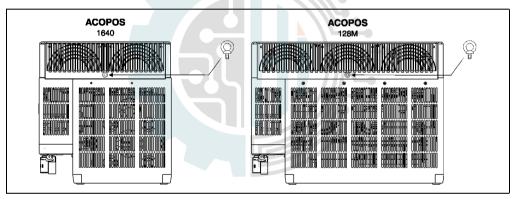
Attaching the eye bolt contained in the delivery to ACOPOS 1640, 128M drives
